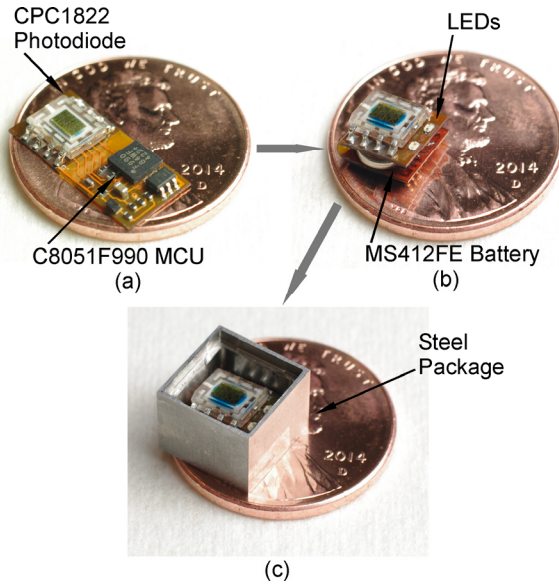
Photos of the ELM1.0. (a) Photo of ELM1.0 flexible polyimide PCB before assembly. (b) Photo of the folded ELM1.0 stack. (c) Photo of the ELM1.0 in the package.
